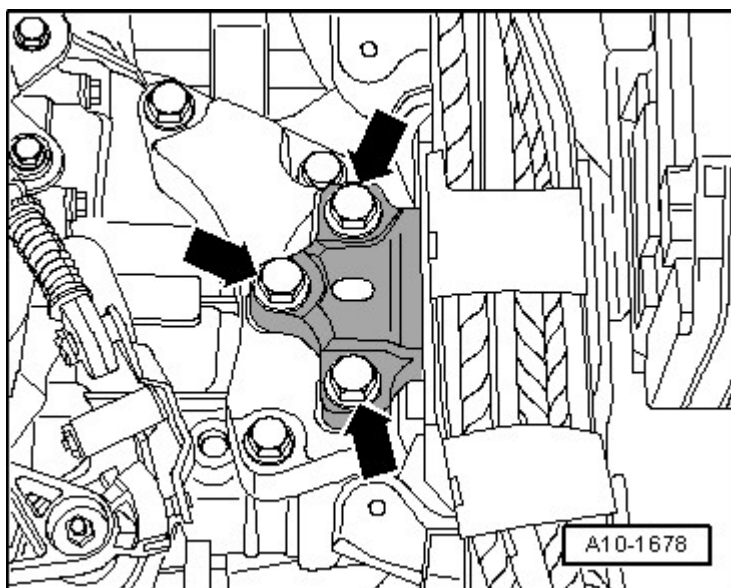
Identifying Bolts To Assembly Mounting On Transmission
